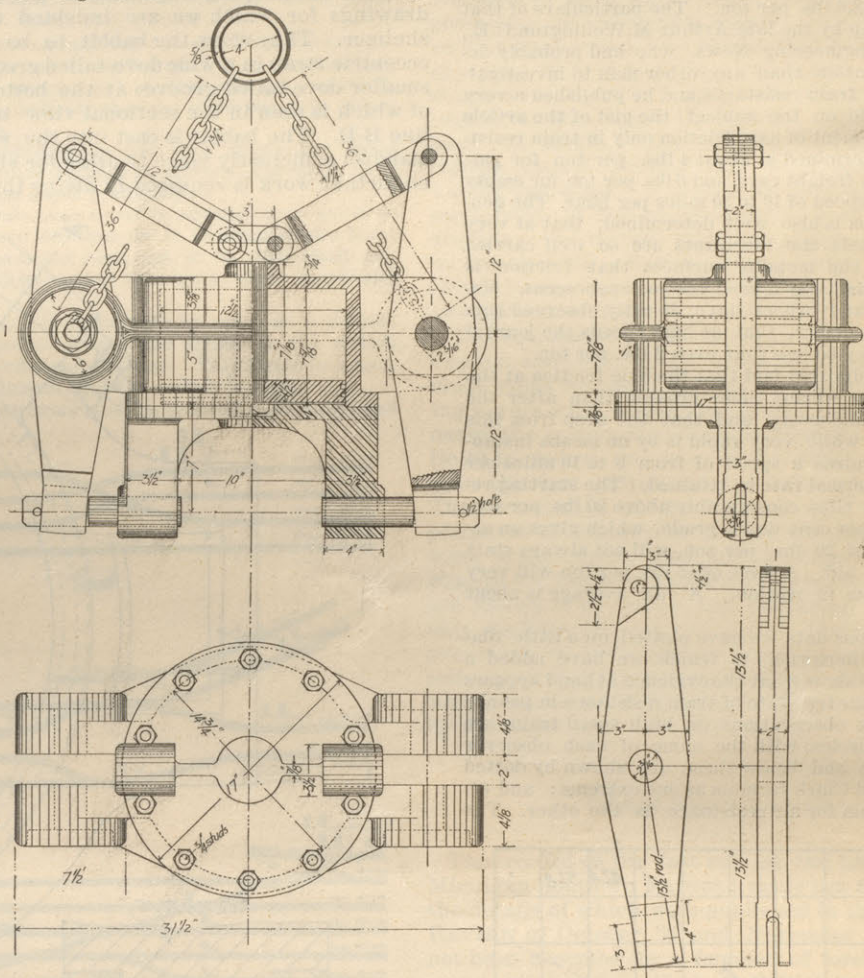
BAIRD PNEUMATIC MUD RING RIVETER.
